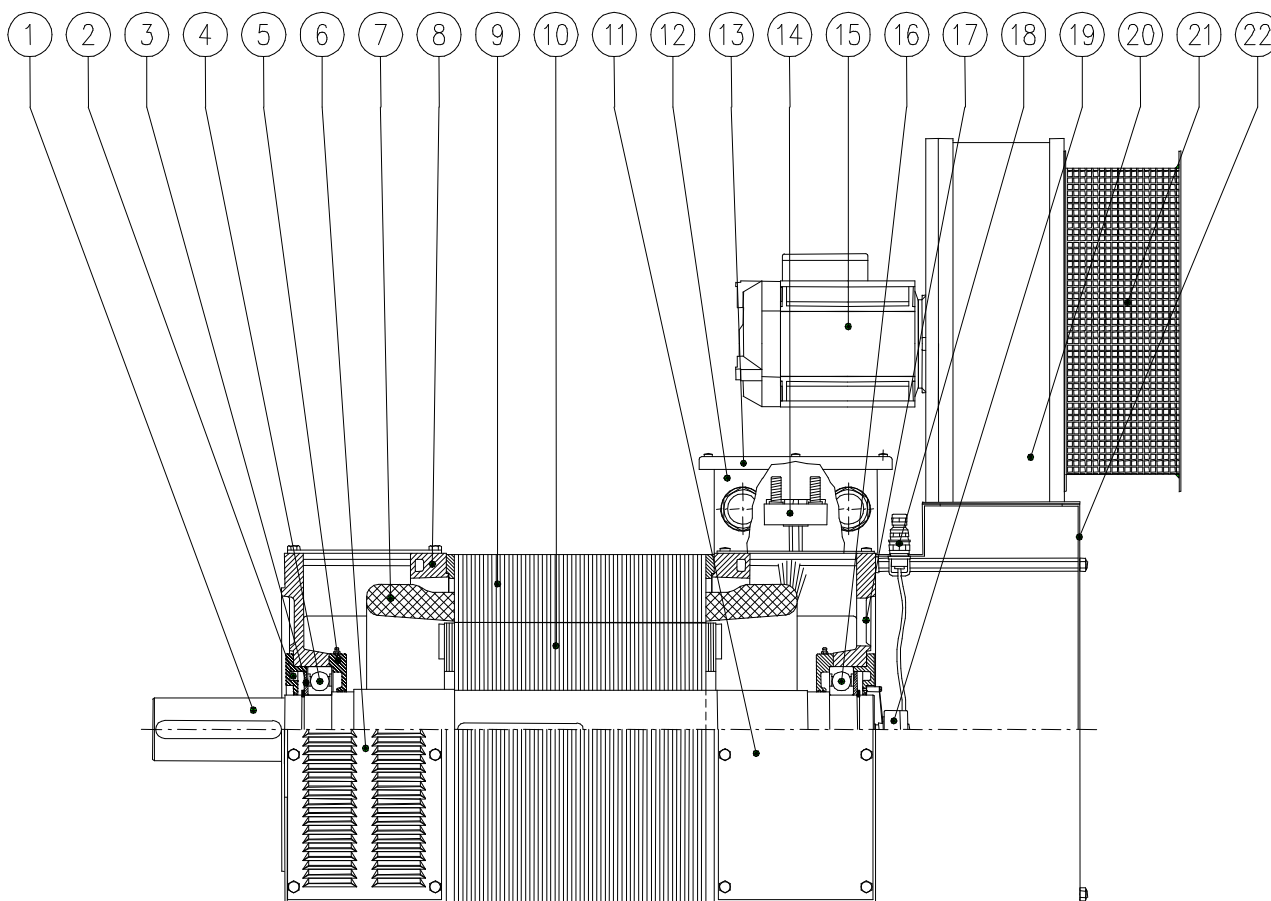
BQAr-BQCr132-160 motors layout diagram
